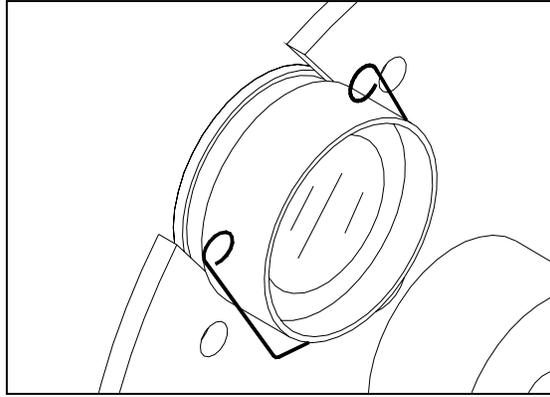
Correct Filter Spring Positioning (view of Filter Wheel from filter spring side)
